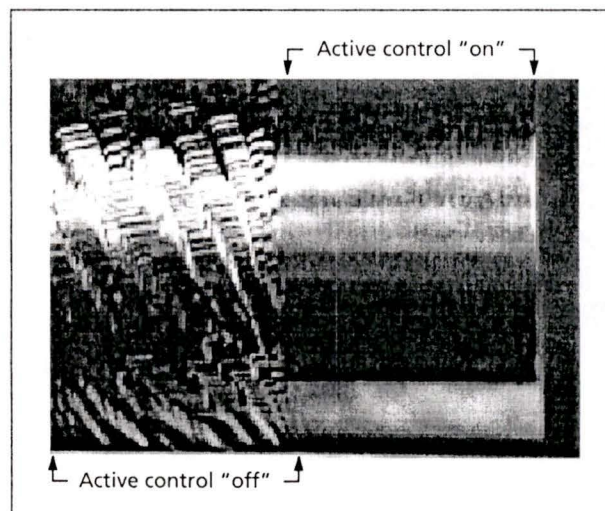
Surface finish comparison of surfaces produced with and without the Boring Bar active control tool [6]
